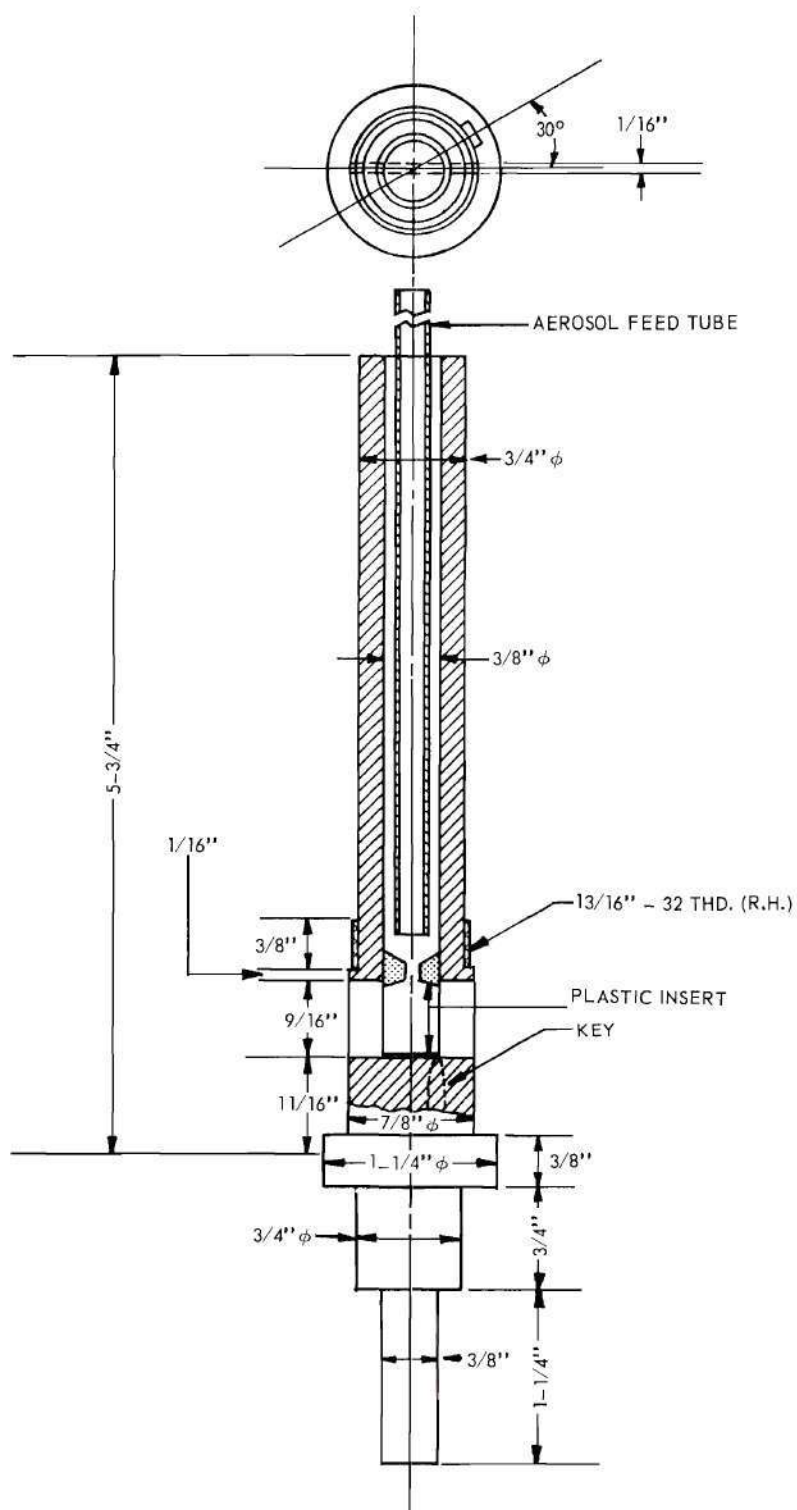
Centrifugal Classifier Rotor Shaft and Aerosol Feed Tube.
